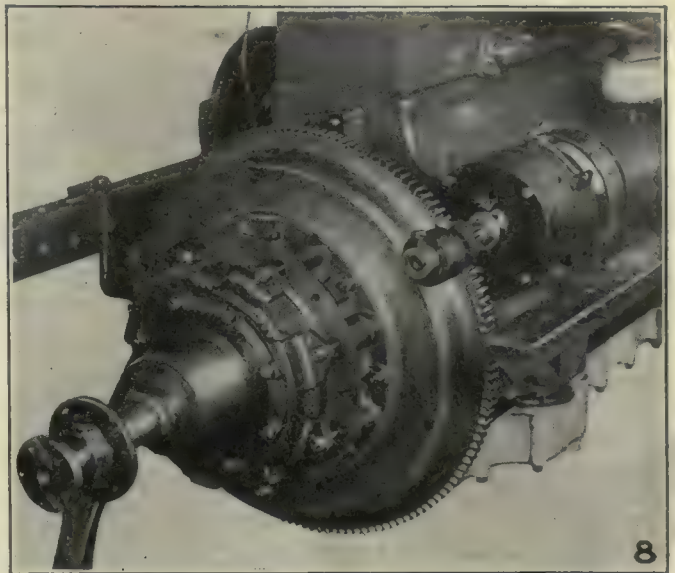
CORRUGATED OIL PAN IN PLACE WITH OIL PIPE CONNECTIONS. FIG. 7. FLYWHEEL, CLUTCH SPIDER AND STARTER IN POSITION. FIG. 8. CLUTCH ASSEMBLY COMPLETE AND TRANSMISSION SHAFT.
